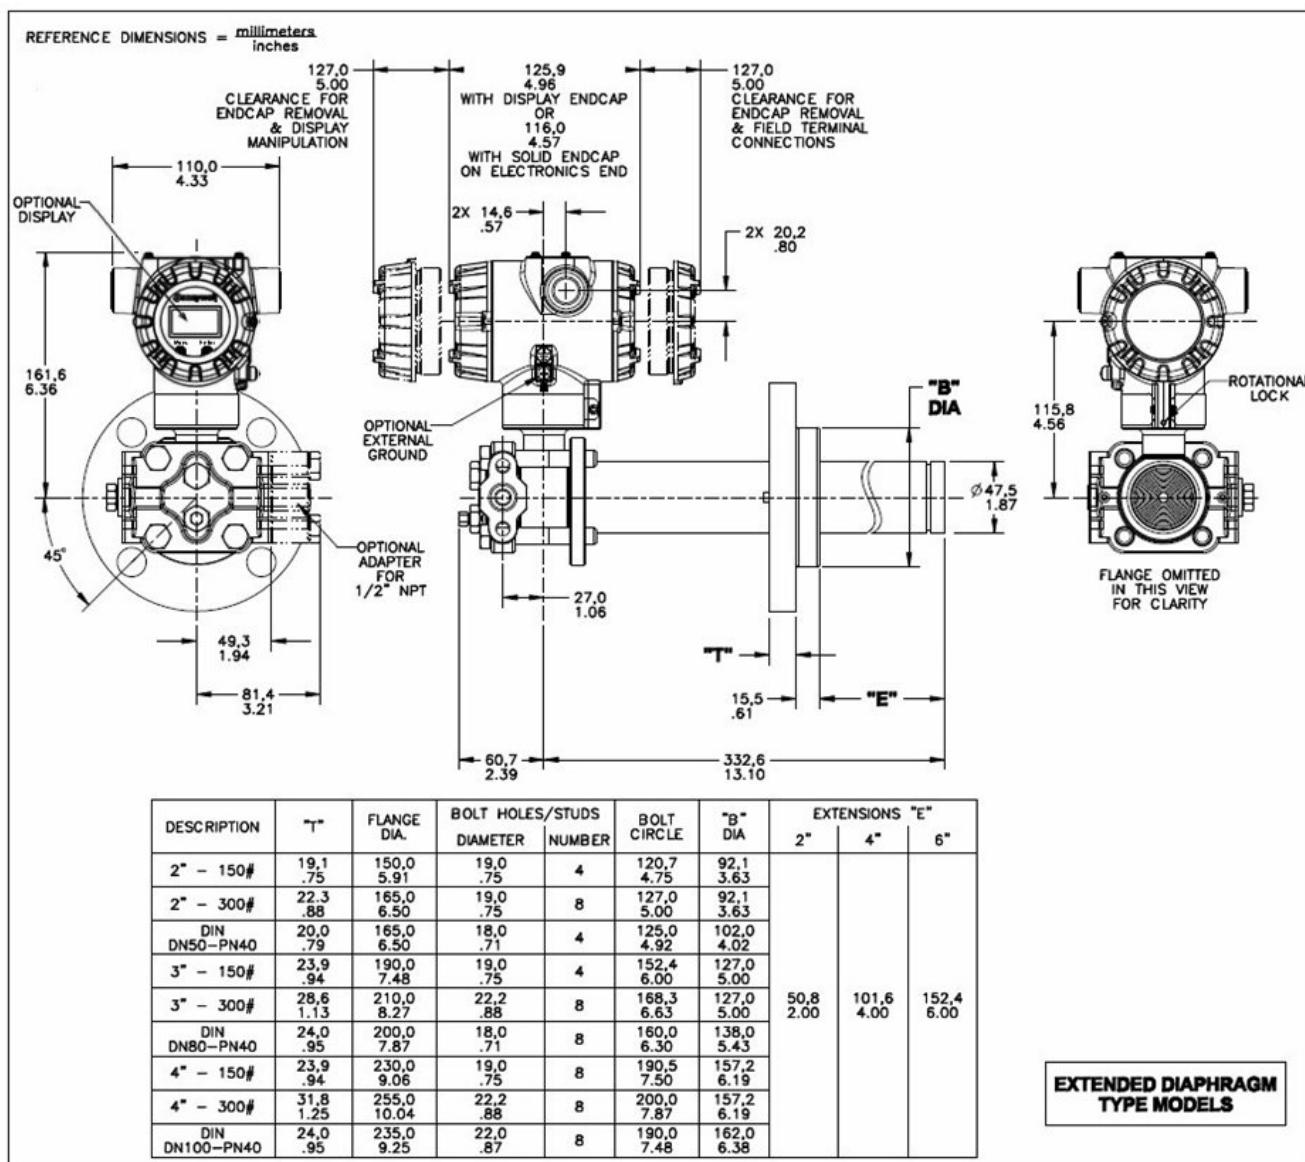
Typical mounting dimensions for extended diaphragm type models STF725 and STF735.
